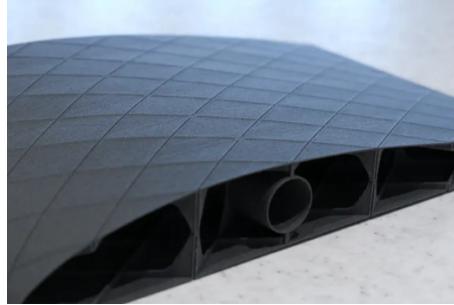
Cross section of a plane wing printed in vase mode with inner struts formed by incisions.
